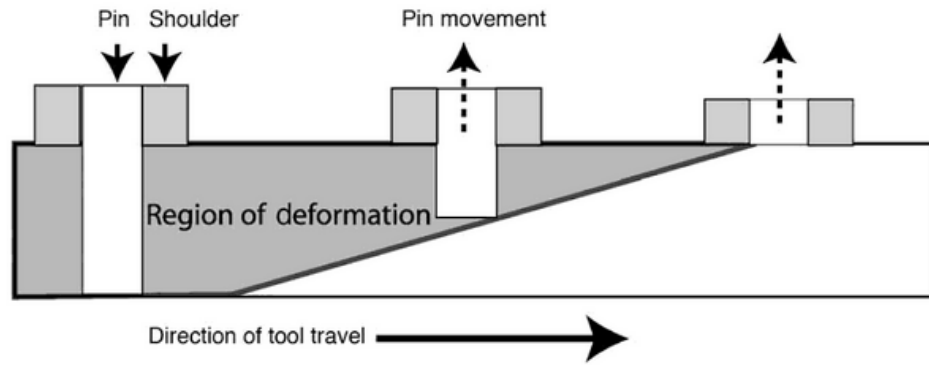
Retractable pin-tool movement throughout weld line [24].
